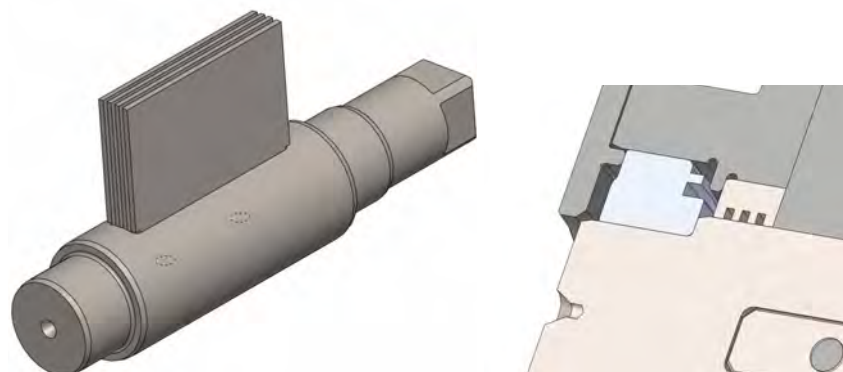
The 3D-view of labyrinth seals on blade and shaft
